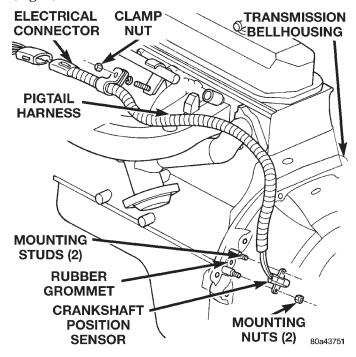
Crankshaft Position Sensor—2.5L Engine
